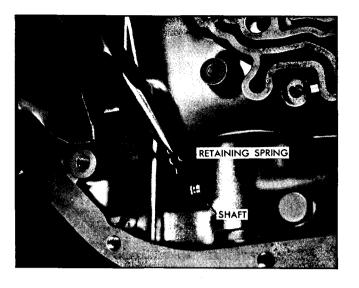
E-67 Removing Retaining Spring from Parking Pawl Shaft
